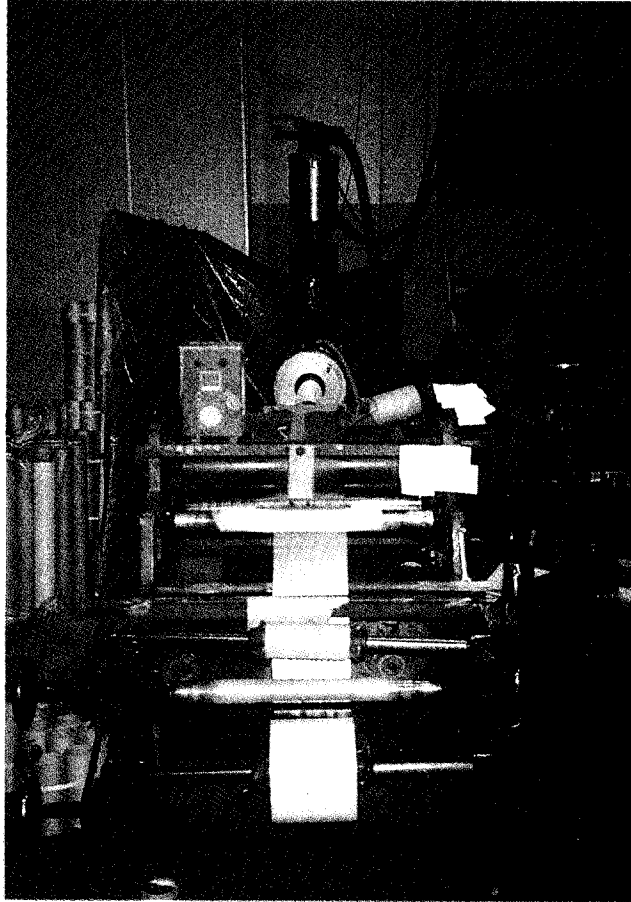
Extension-blowing process for manufacturing the modified polyethylene film.
